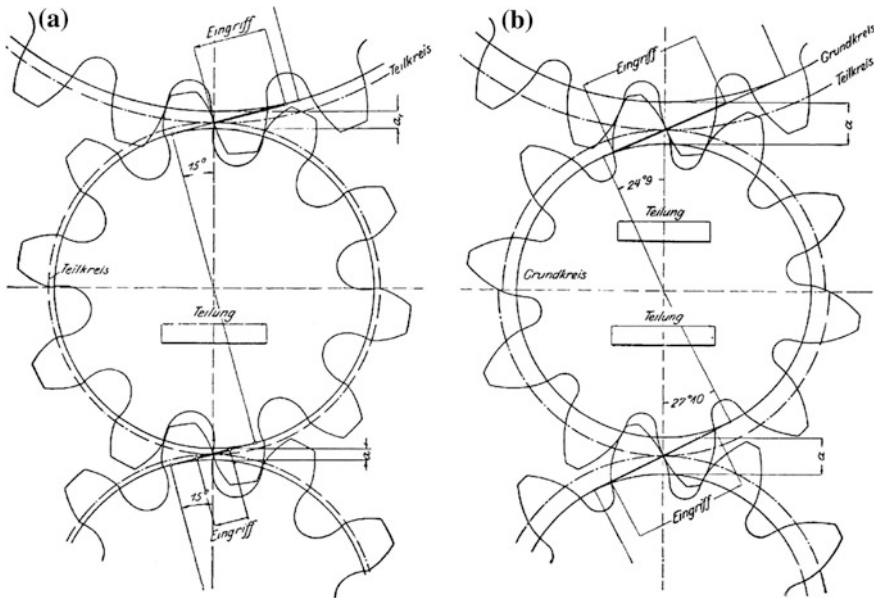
Threesome gear train a after Willis; b after Hoppe
